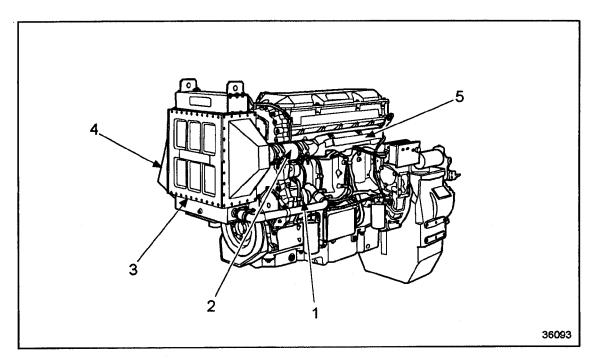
Radiator—mounted Charge Air Cooler and Related Parts (Series 60 Diesel Engine)
